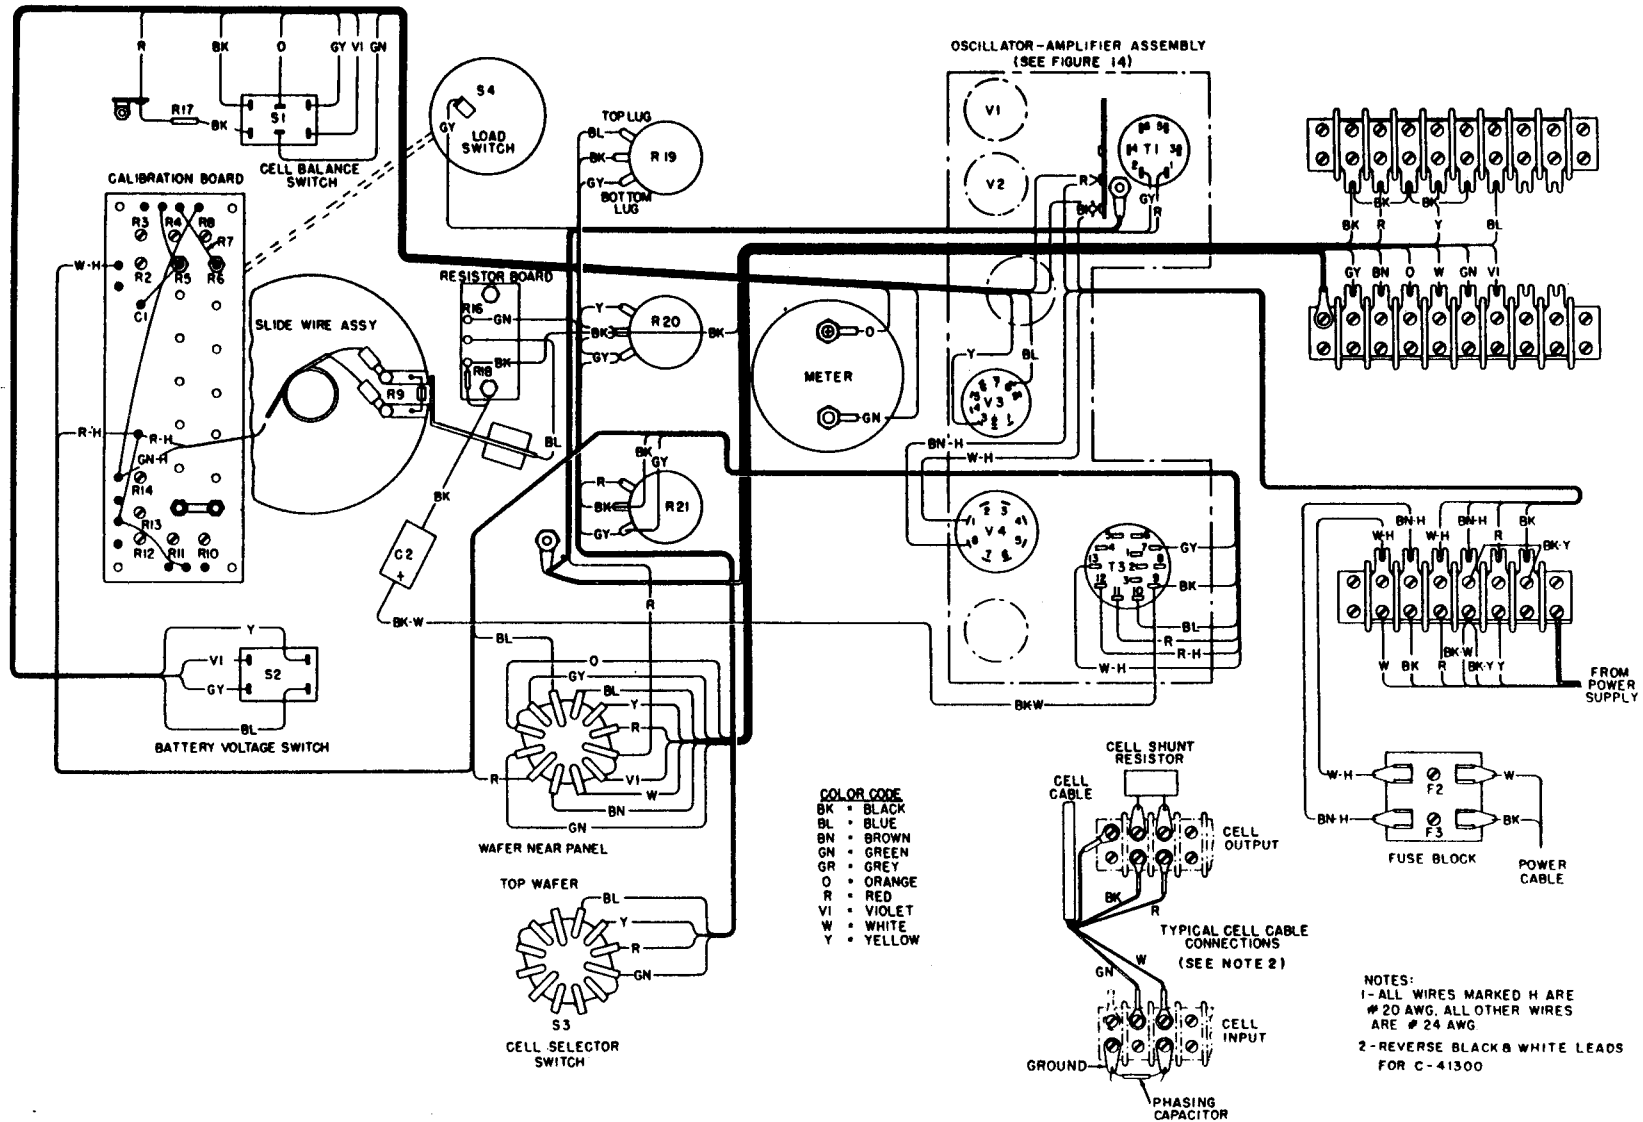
Indicator Assembly Wiring Diagram (Model C-1).
